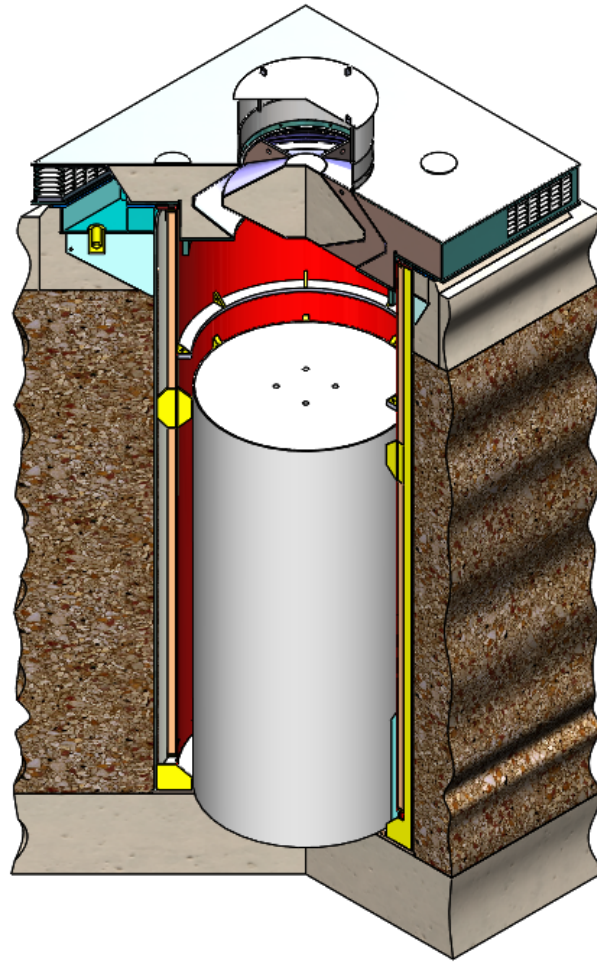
(b): VVM Components Shown in Assembled, Cut-Away View
